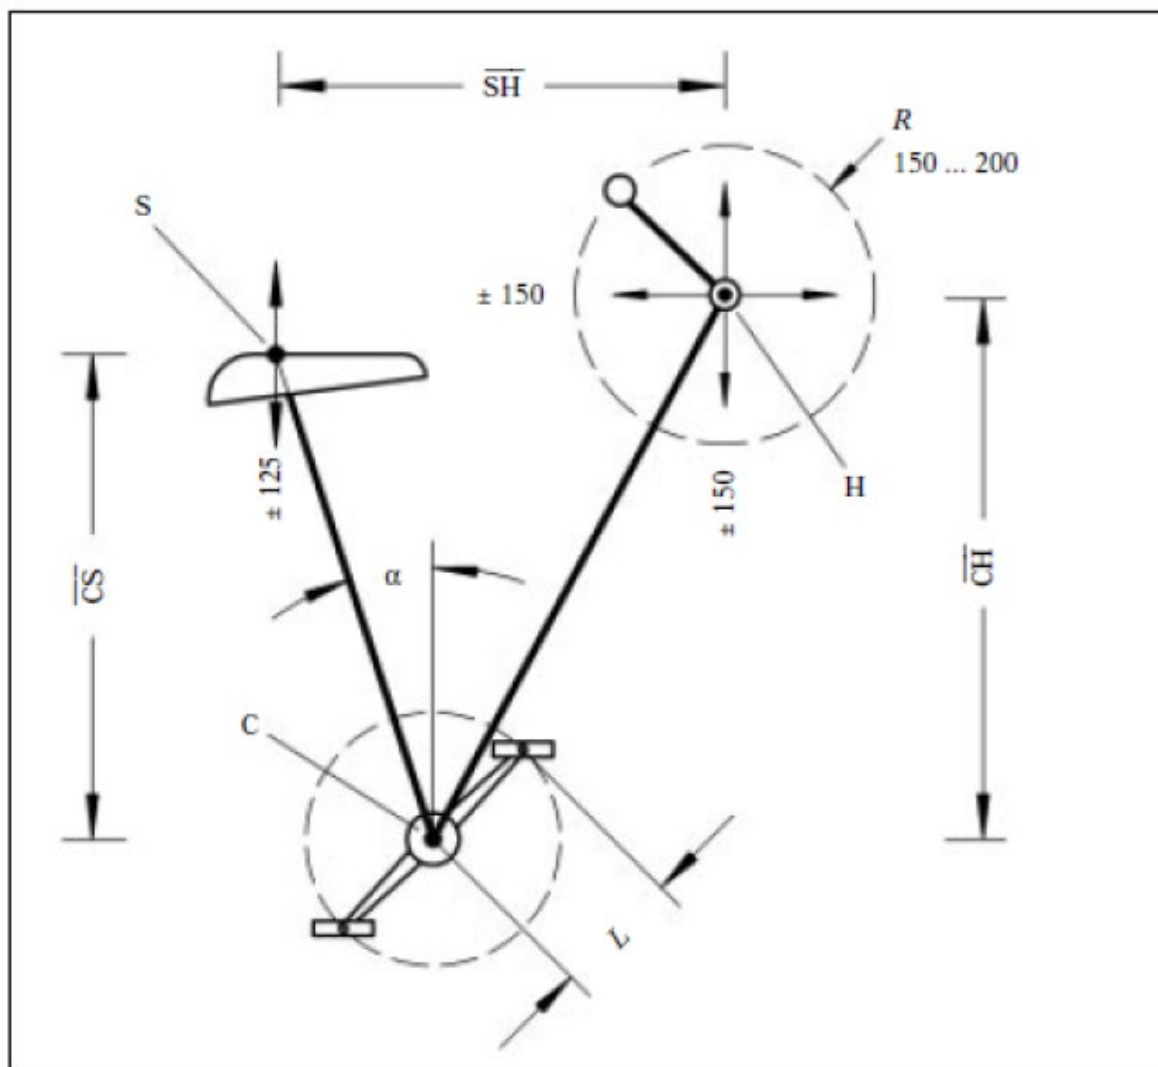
Definition of basic saddle position S, basic handle position H and centre of foot crank bearing C (dimensions in mm).
